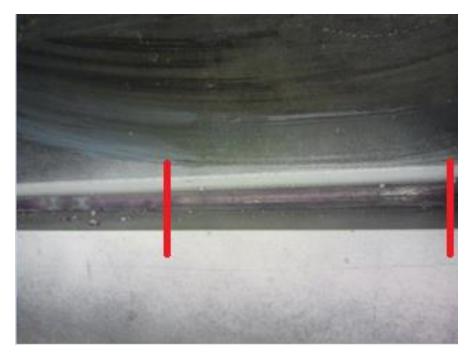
S355 root crack seen with penetrant fluid test between two red markers
